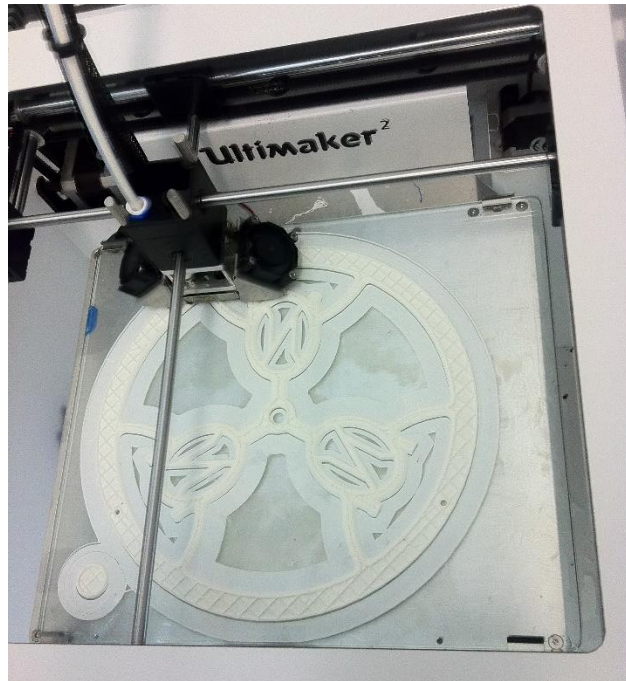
Printing Sandcasting Pattern on Ultimaker2 FDM Machine
